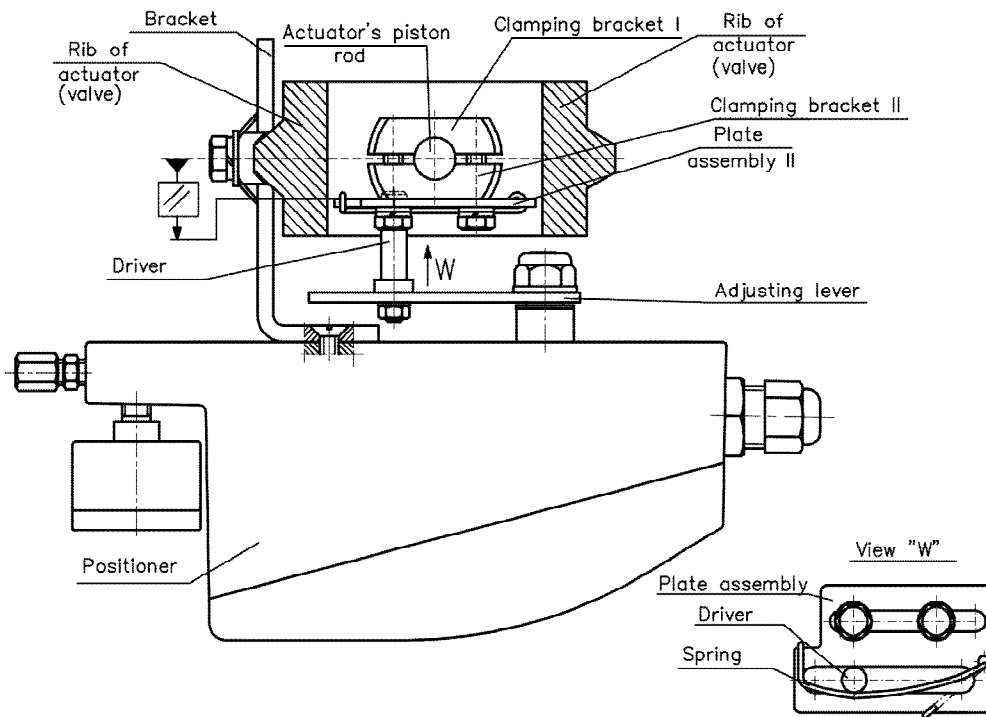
Positioner type APIS-1X0-... with mounting kit APIS-A0000-SS(SO) (positioner mounted on column type actuator P or R by Polna Ltd company).
